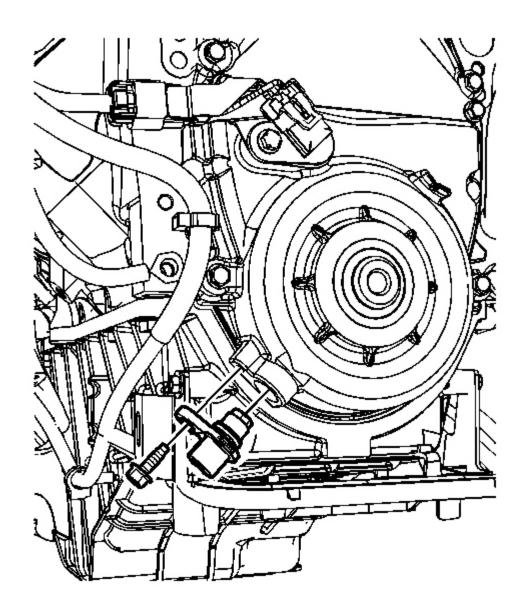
CKP Sensor Bolt And Sensor Courtesy of GENERAL MOTORS CORP.
